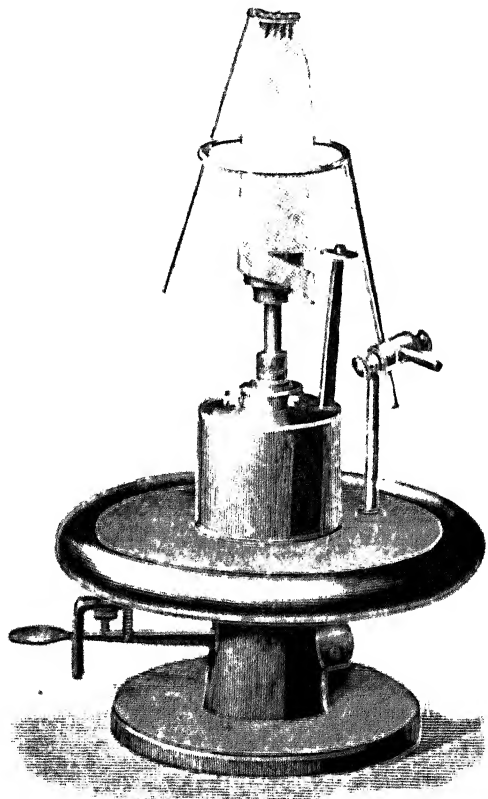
Machine for Burning Upright Mantles,  $\frac{1}{4}$  Actual Size.
